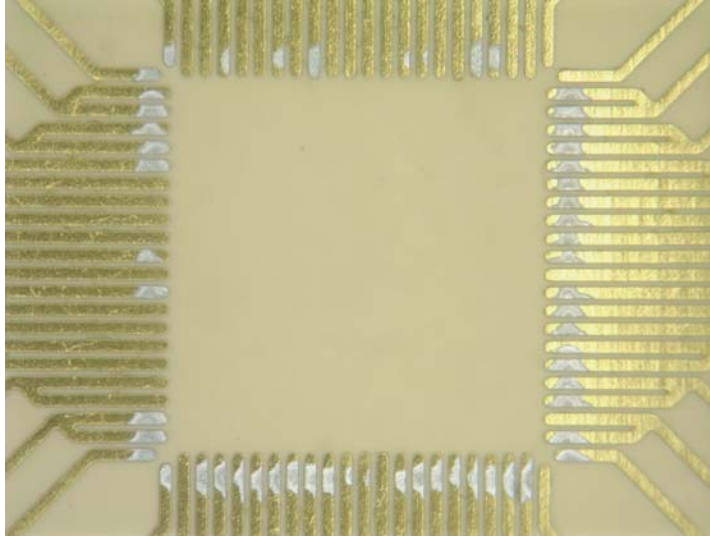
Solder Bridges Between Bottomside Traces Caused by Escaping Molten Solder
